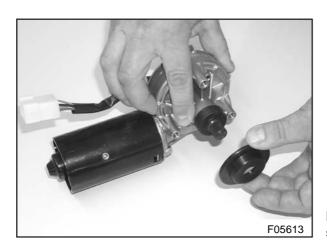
Wiper motor dust cap installation (for the sake of clarity shown with the motor out of the coach)
